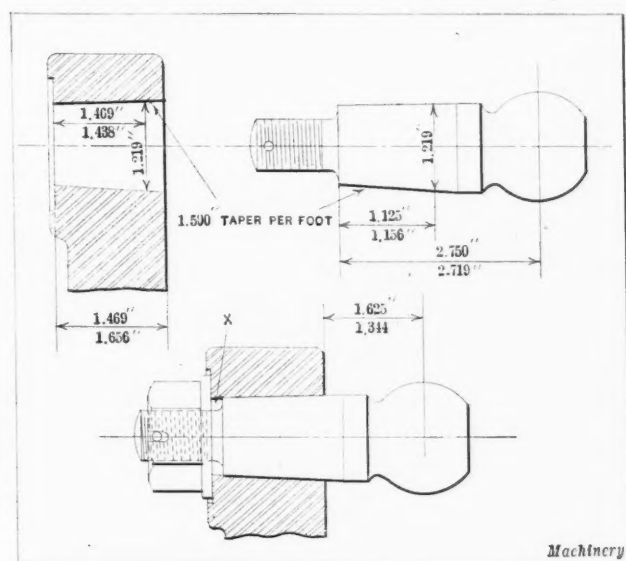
Illustration showing how the Method of dimensioning Tapers is applied when a Definite Amount of Space must be allowed for Lengthwise Adjustment
